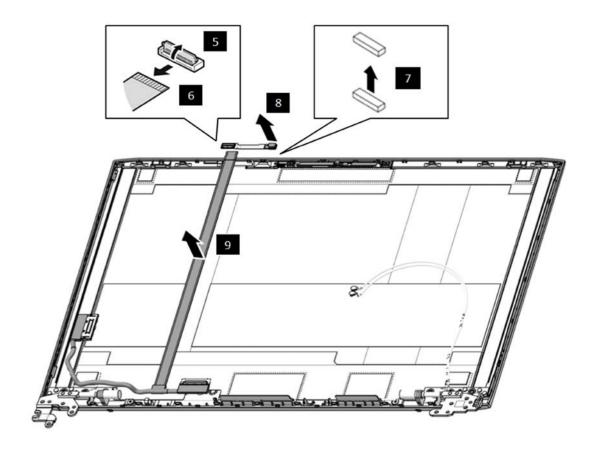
Disconnecting the Edp Cable FFC from Camera FPC Assembly
